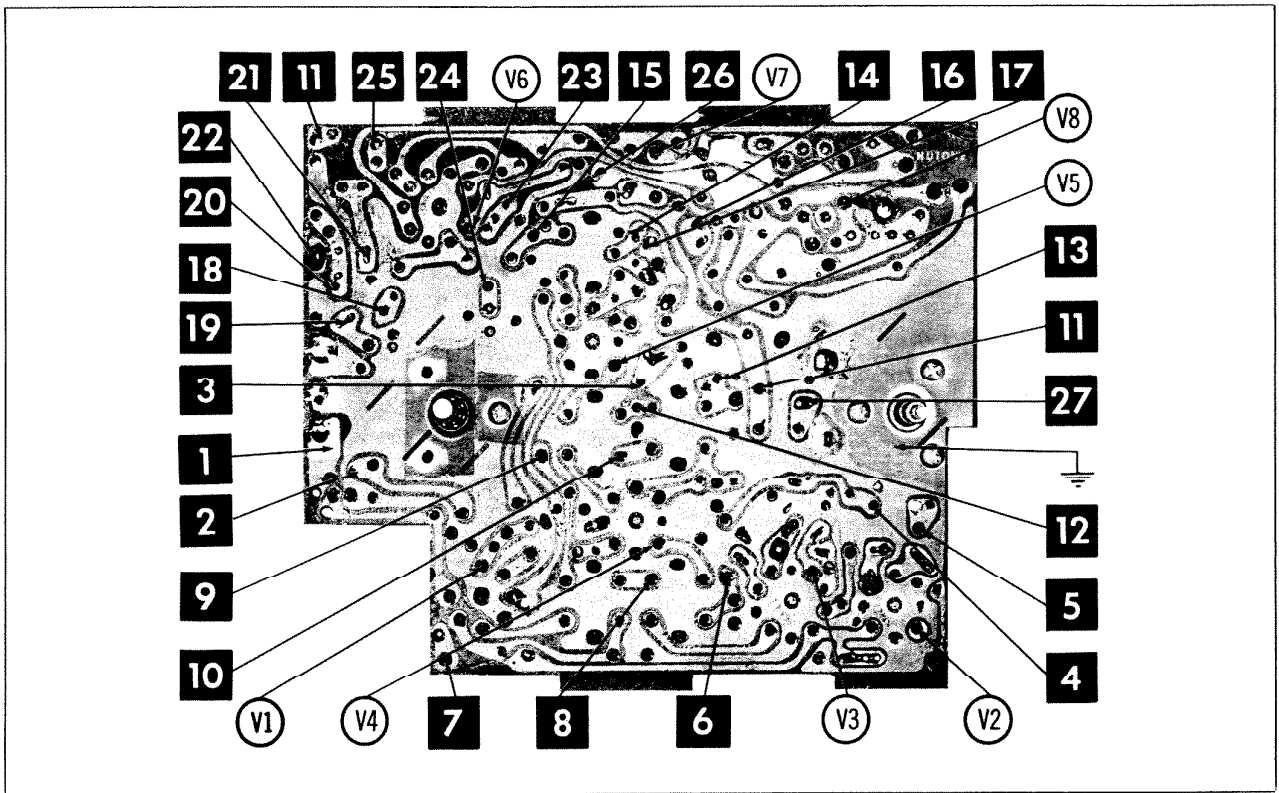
Bottom view of master chassis printed board, with location of printed circuit points as shown on schematic in Fig. 19.
